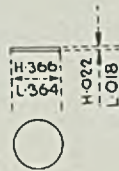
C—Above is the glazed board disk blanked from sheet and used to hold cordite charge in place and to act as a filler between charge and bullet
